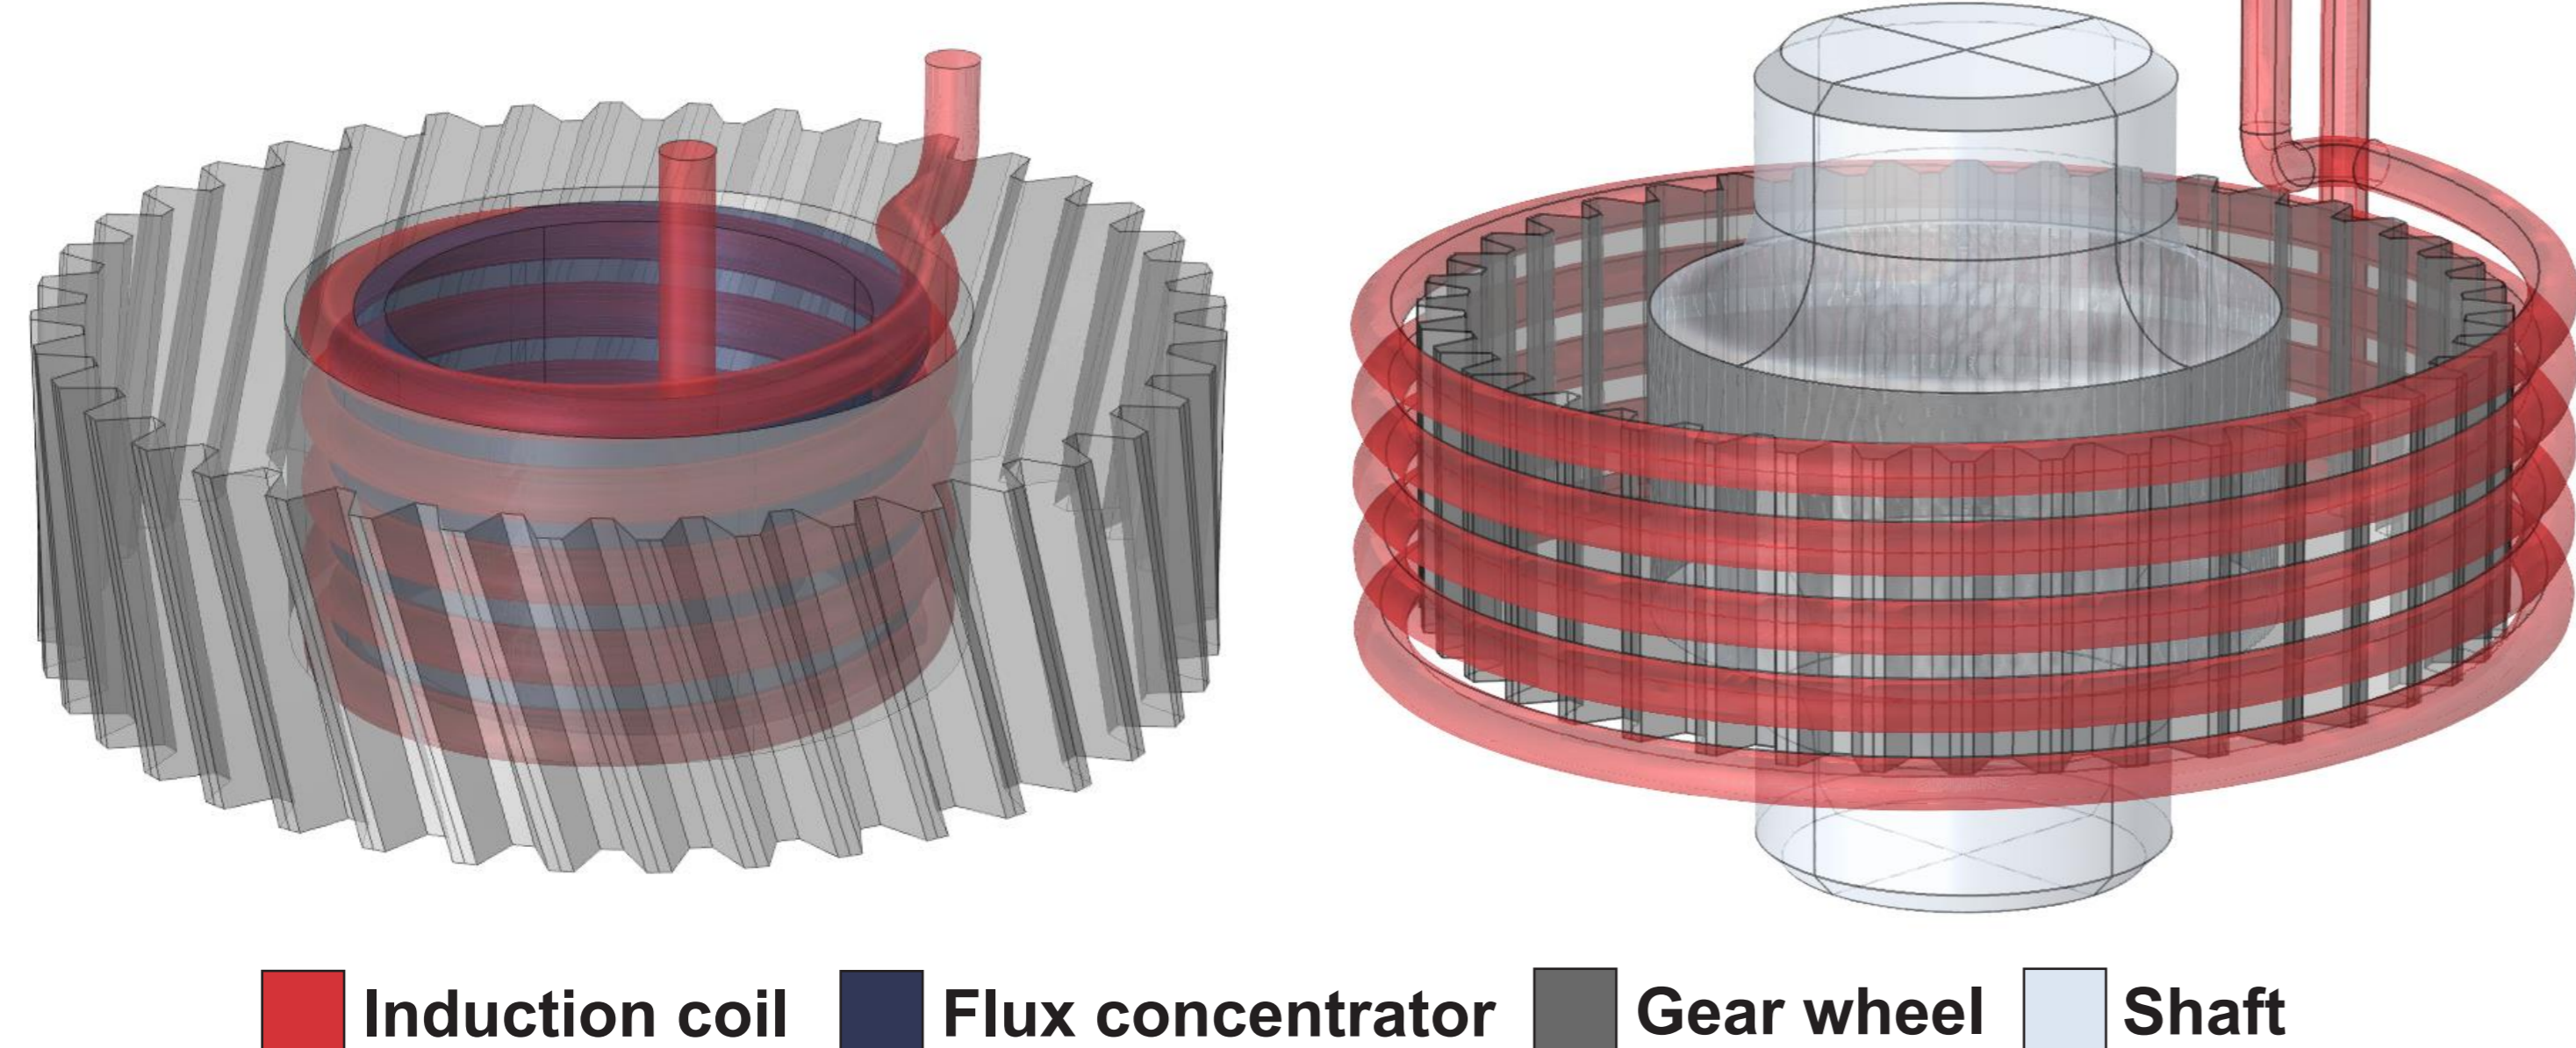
Gear wheel with induction coil for shrink fitting (left illustration) and the compound of gear wheel and shaft with induction heating for the application of unloosening (right illustration).
